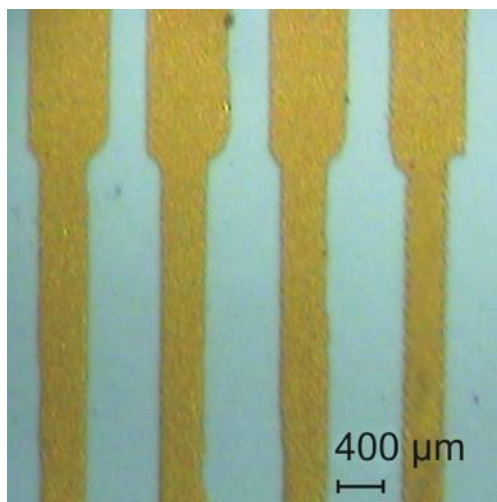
Close-up view of the contacts printed using standard thick film technique
